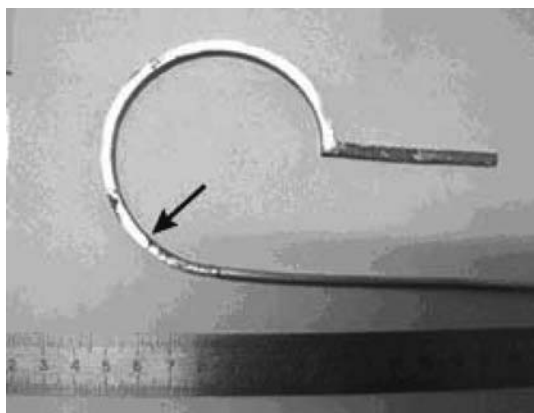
An Al workpiece in the process of ECAP-Conform.
